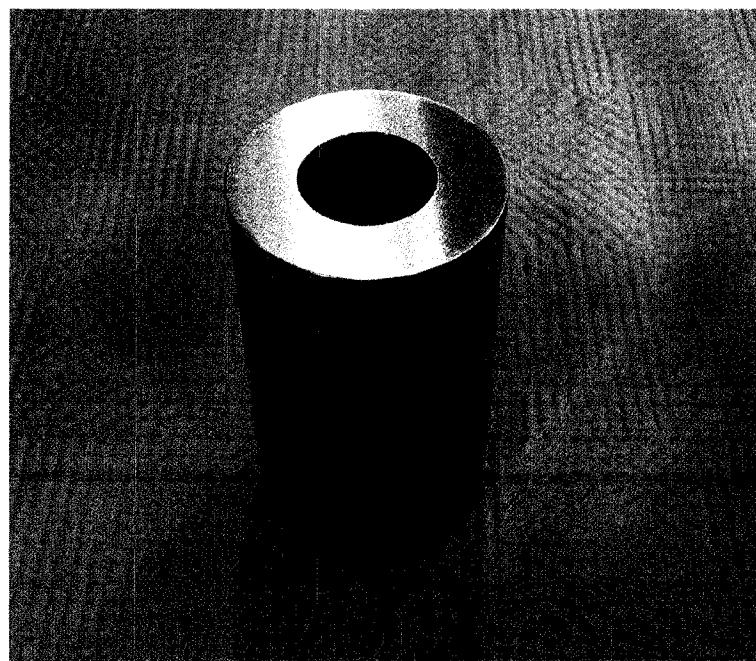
Inconel 718 Test piece for friction welding
